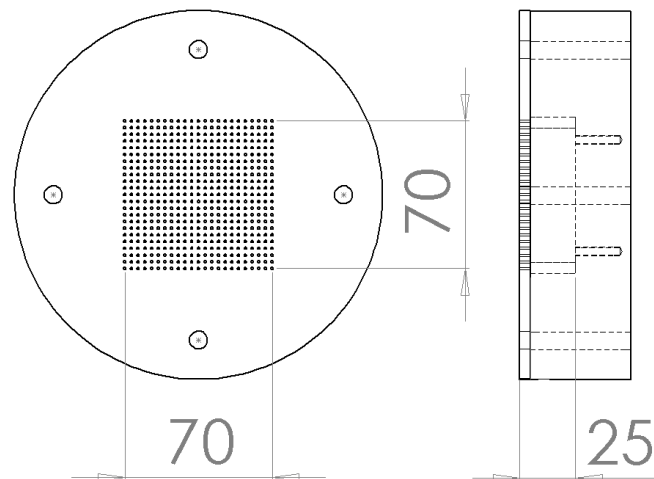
Design space for resonant array sample to be used with the medium scale impedance tube. (Dimensions in millimetres)
